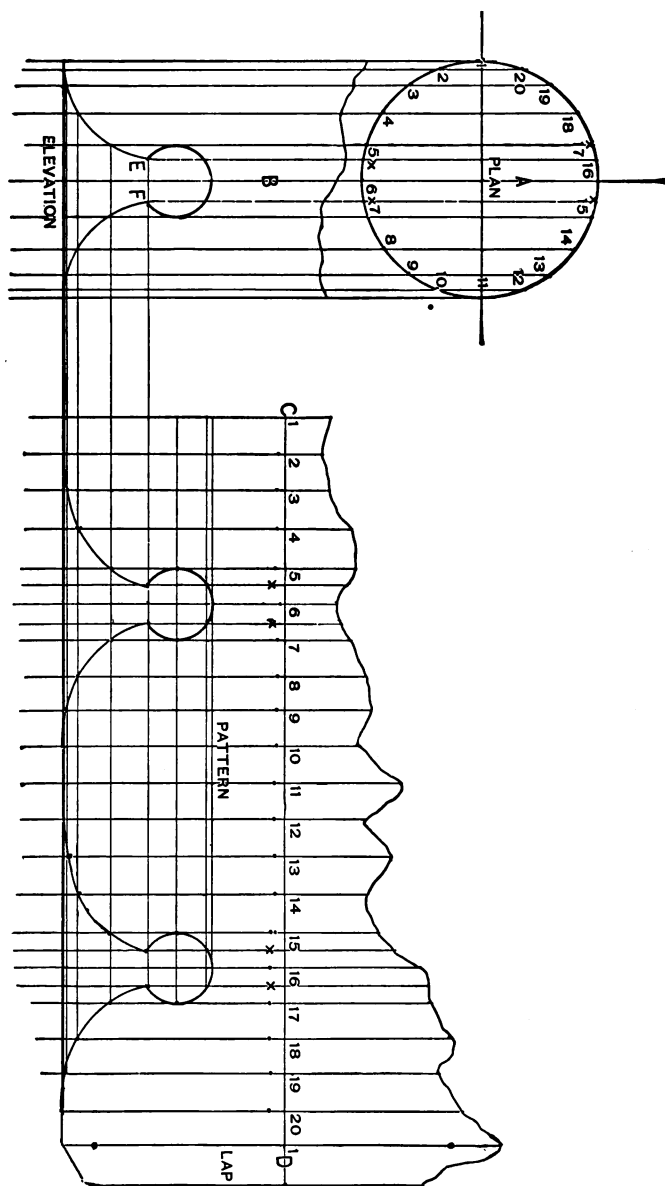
Plan, Elevation and Pattern for Mouth of Spout Shown in Fig. 17.
